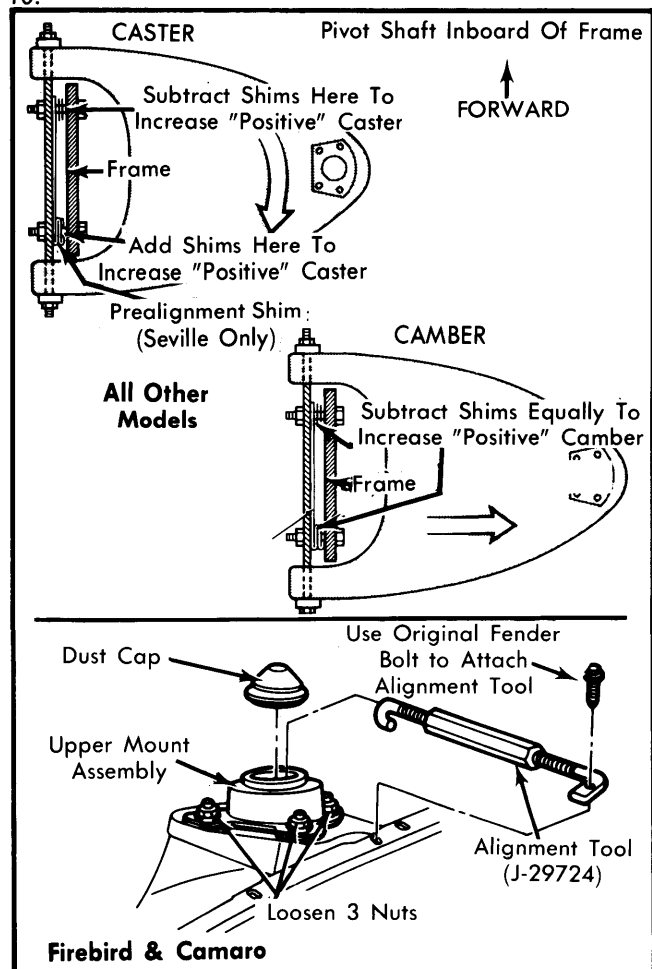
Caster and Camber Adjustment Rear Wheel Drive Vehicles
